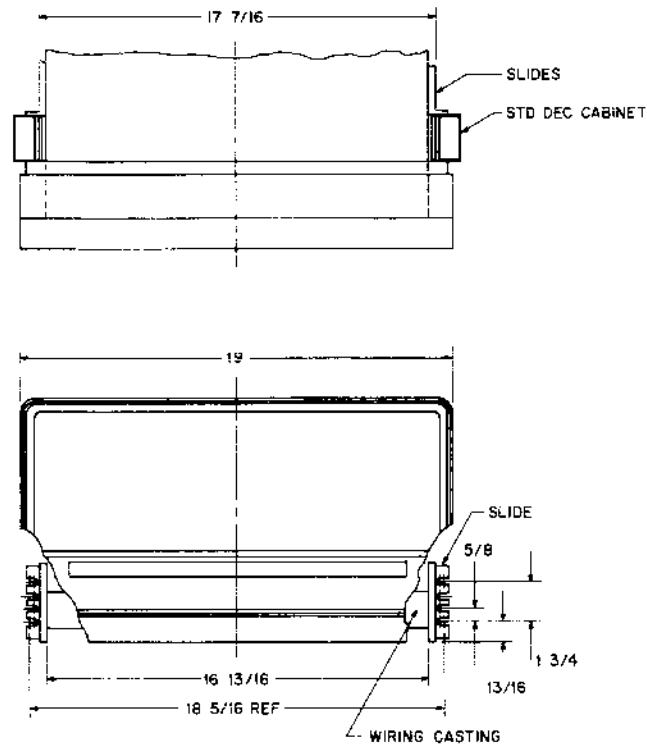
Dimensions, PDP-8/S Mounted in Standard DEC Rack
